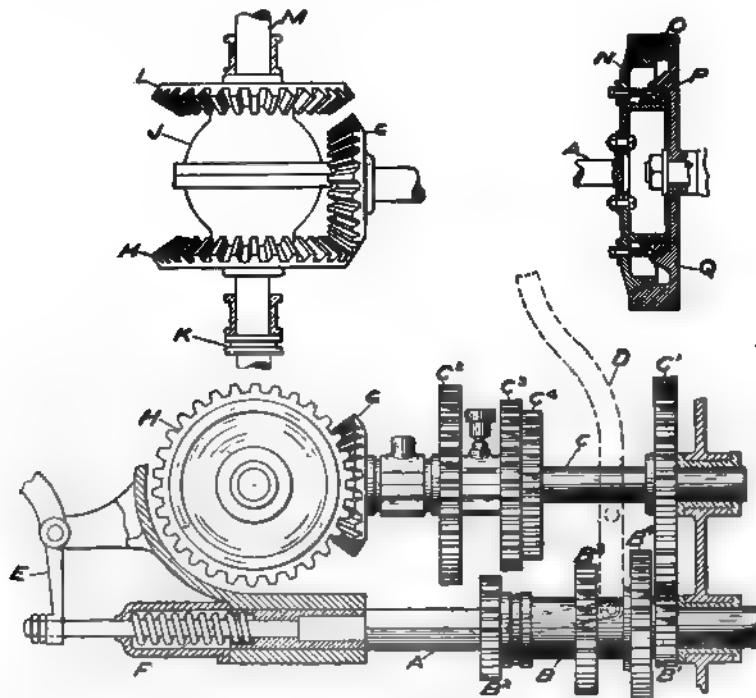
Details of the Panhard-Levassor Change Speed Gear.
